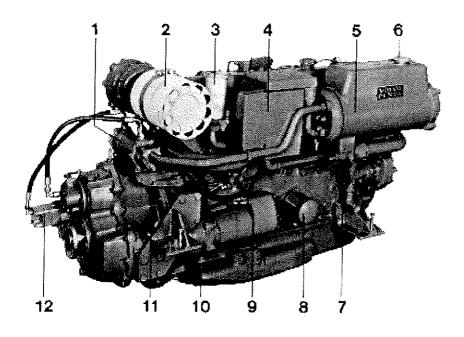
Engine, TAMD70E with tubular heat exchanger
